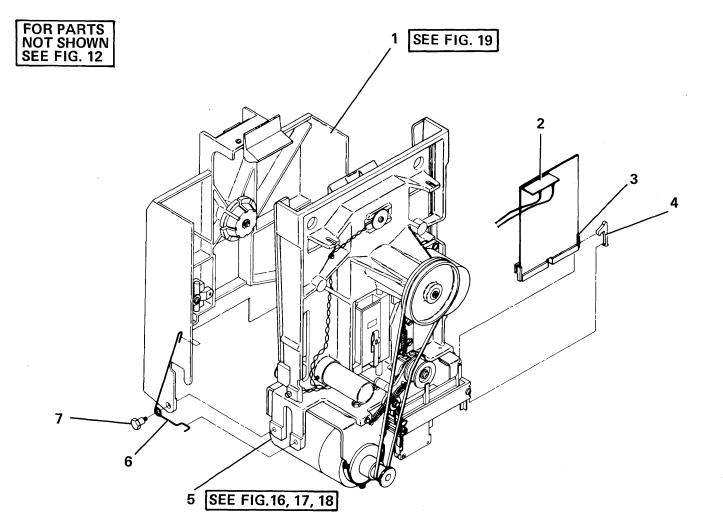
DISK DRIVE ASSEMBLY. SEE LIST 15.
